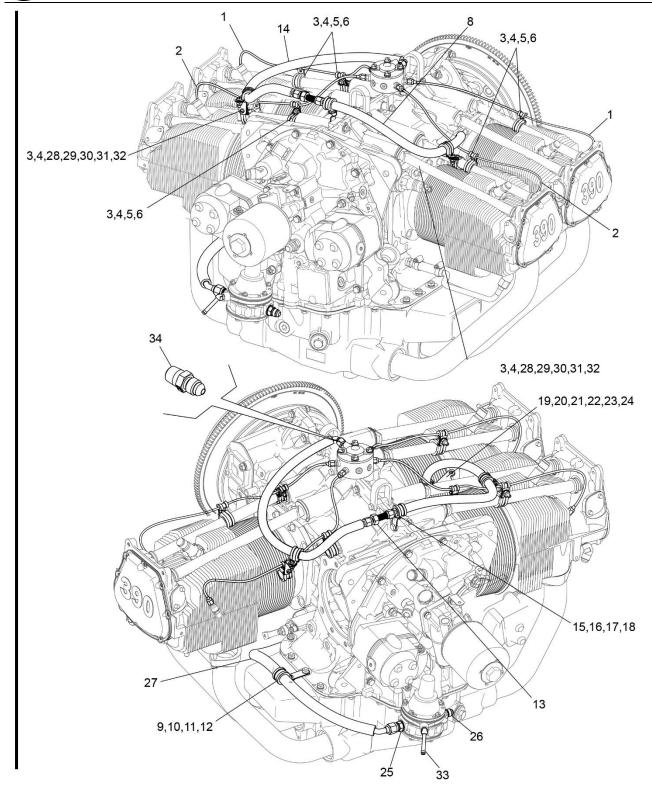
B Fuel Lines, Fuel Hoses, and Attaching Parts (C1B6 and C3B6)
